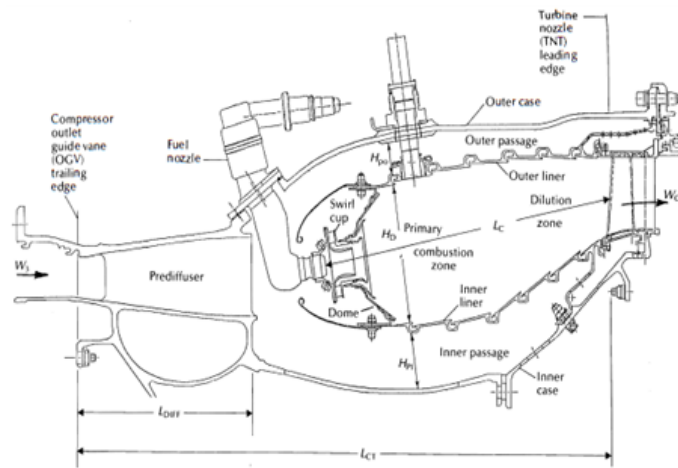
Typical Modern Combustor: GE CF6-80C [17]
